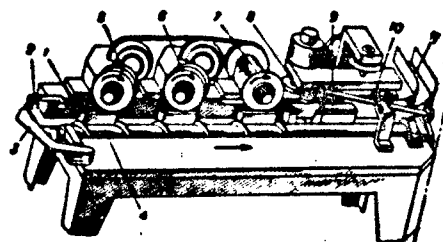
Semiautomatic machine tool for complex machining of rectangular workpieces: 1) Workpiece; 2) loading aperture; 3) loading lever; 4) screw conveyor to transport workpiece along bench; 5 and 6) abrasive (grinding) wheels for facing; 7) abrasive wheel for cutting grooves; 8) miller for punching films and milling holes; 9 and 10) brushes for cleaning dust from finished product; 11) trough for moving finished products to packing bench.
